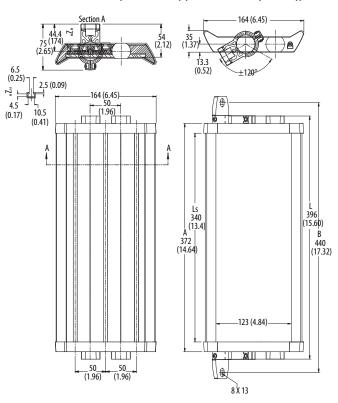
Dimensions of the Mirror (440L-AM125) (Width 125 mm (4.92 in.))
